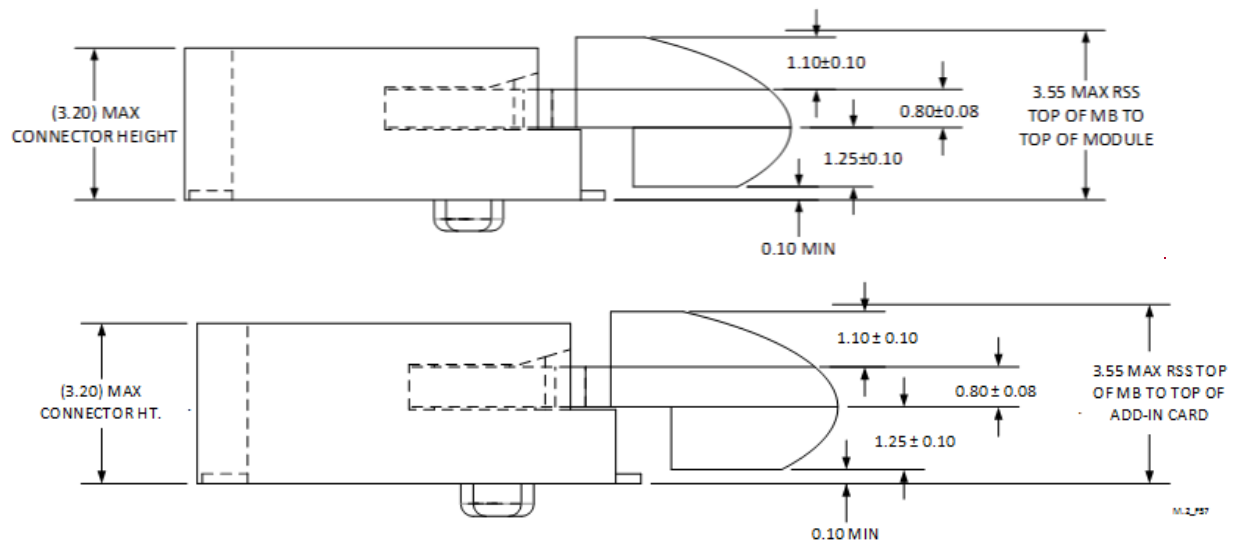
H3.2-D1 - Stack-up Top Mount Double-sided Add-in Card for 1.20 Maximum Top-side Component Height
